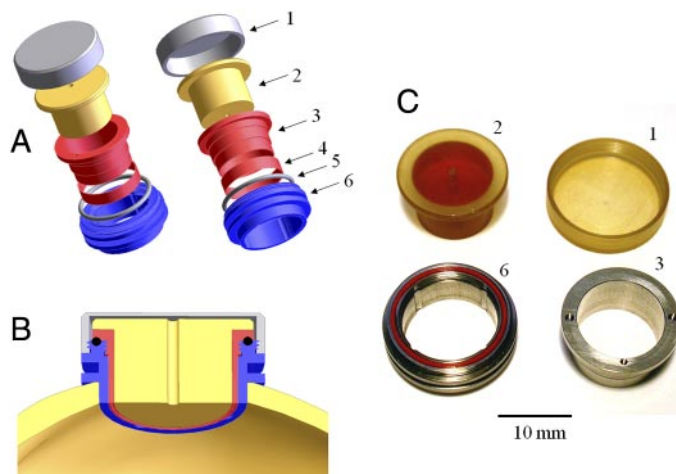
Design and assembly of the recording chamber system. *A*: exploded view of the design drawing of the chamber system in 2 orientations. *B*: cutaway view of the fully assembled chamber system mounted onto a 3-dimensional (3D) cranial model of a monkey's skull. The colors of the chamber system components are the same as depicted in *A*. *C*: fabricated components of the chamber system. Numbers in *A* and *C* indicate the following components: 1, cap; 2, plug; 3, sleeve; 4, retaining ring; 5, O-ring; 6, chamber.
